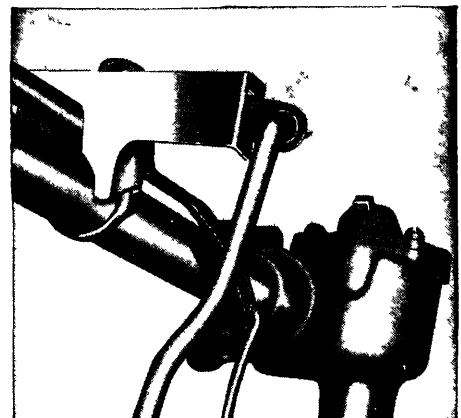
Gearshift control rod adjusting gauge, 1940-48 with synchromesh transmission
